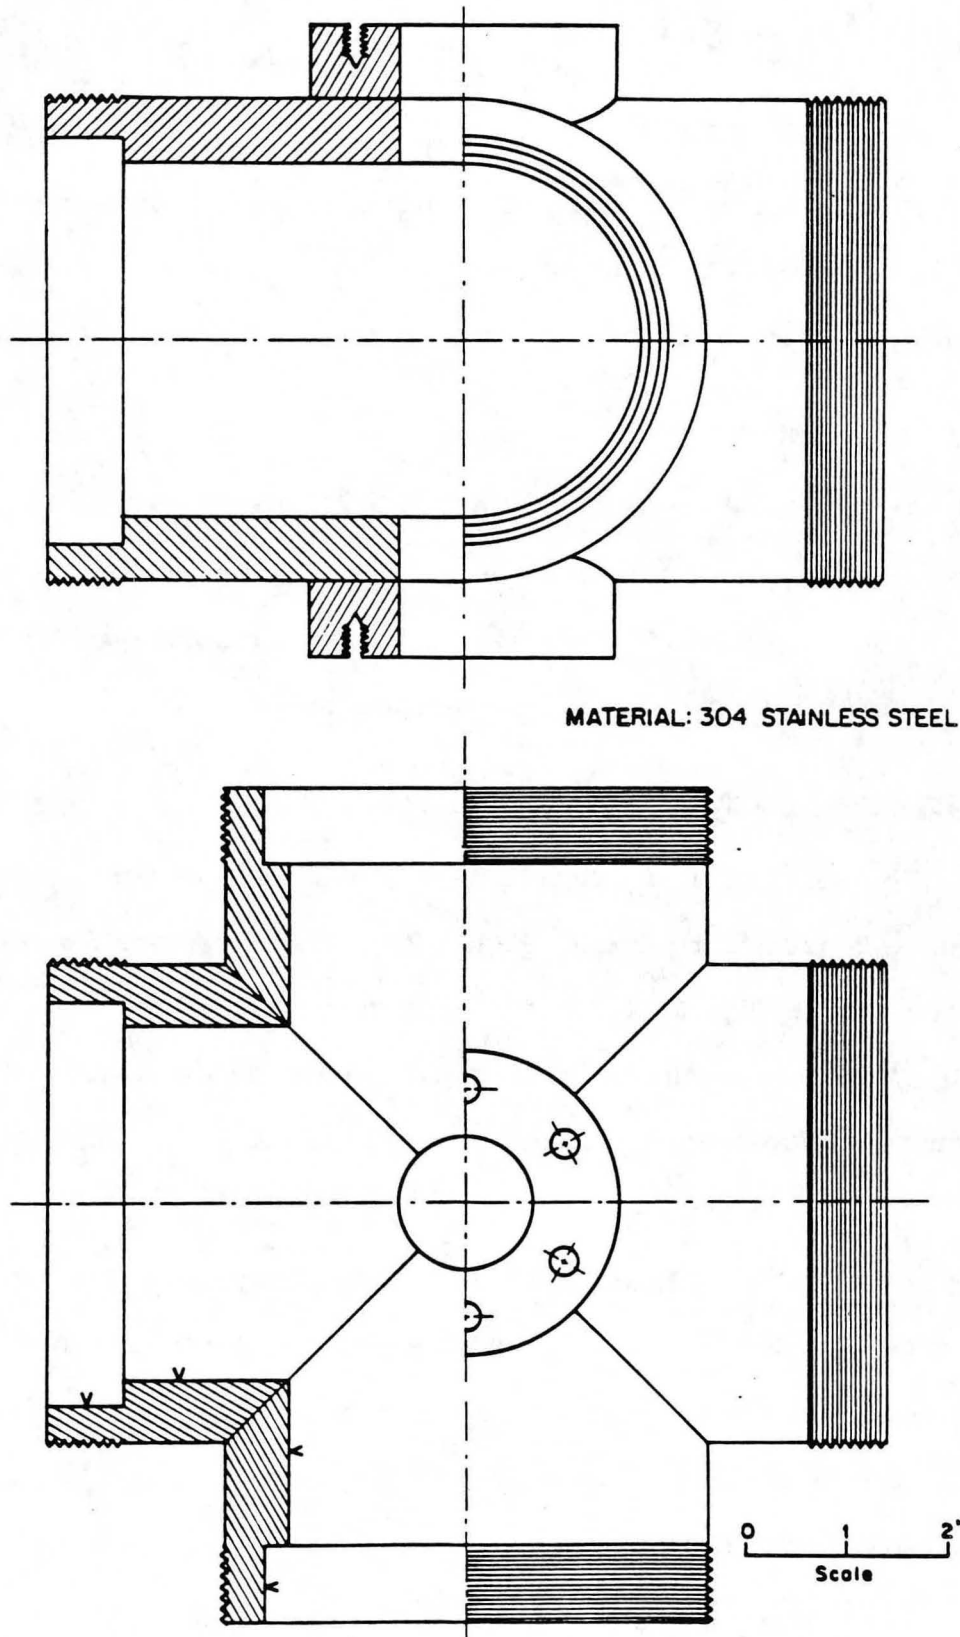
Machine drawing of constant volume combustion chamber. -- XBL 8411-4672 --
